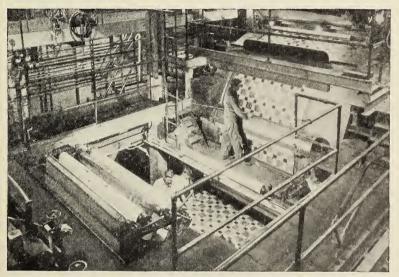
This huge machine is used for making inlaid linoleum. The machine cuts out pieces of different colors, places them to make the design, and rolls them down upon burlap. (Courtesy Armstrong Cork Co.)
